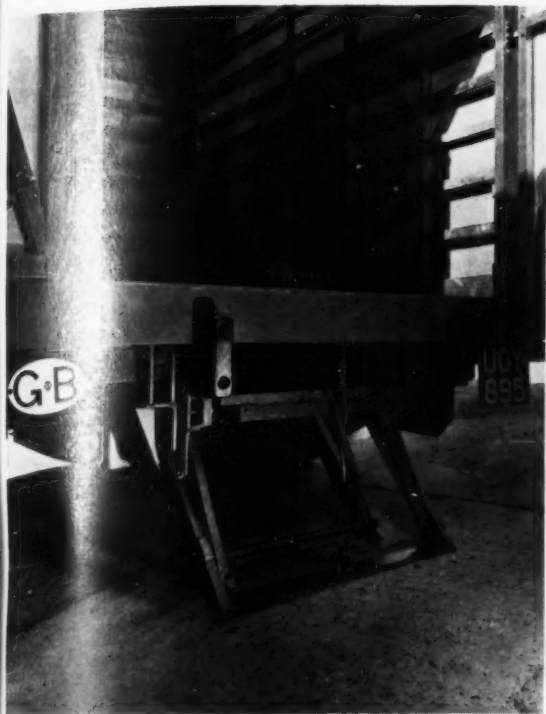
Frame of lift lowered to ground with platform hinged back ready for stowing
